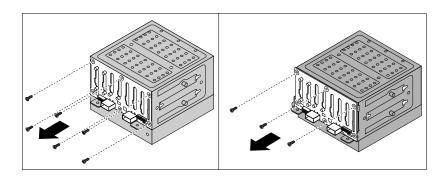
Removing the 2.5-inch hot-swap hard-disk-drive backplane
